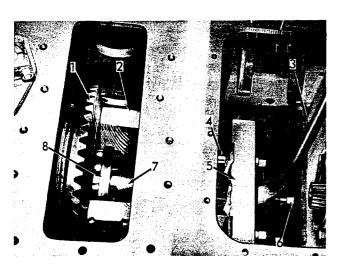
Pulling Bevel Gear Shaft (T-11897)
